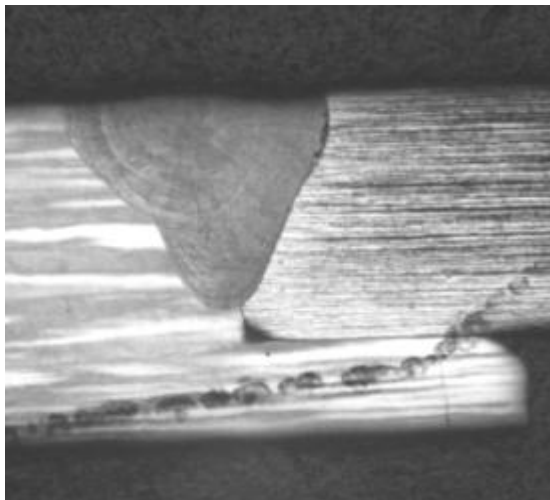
Micro structure of weld with weld speed 1400 rpm.
